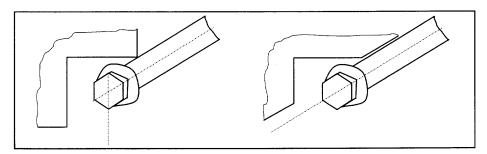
Design for Good Accessibility for Disassembly Tools
